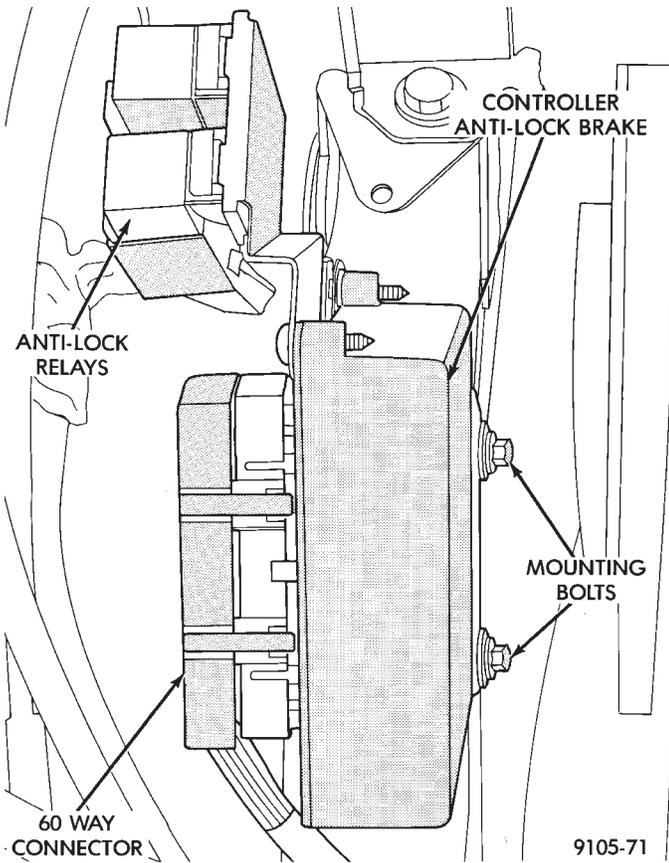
Location Controller Anti-Lock Brake (CAB)
